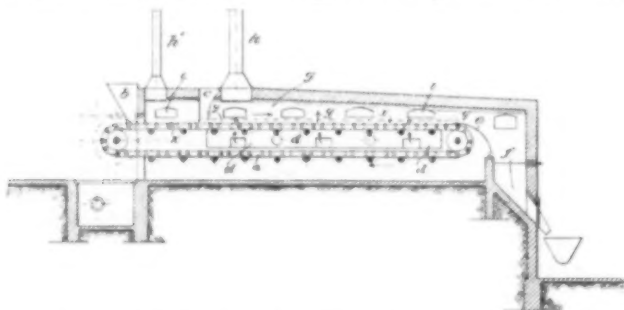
LONGITUDINAL SECTION OF SINTERING MACHINE
